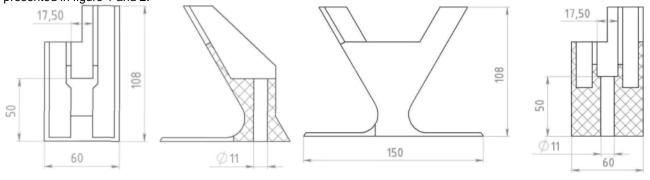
External appearance and overall dimensions YKK-60(mm), YKK2-60 (mm).
